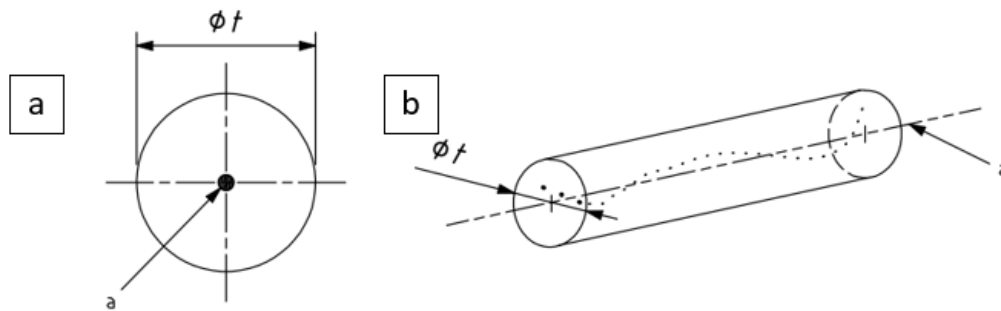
a) Concentricity tolerance of a point; b) - Coaxiality tolerance of an axis (extracted from [62])
